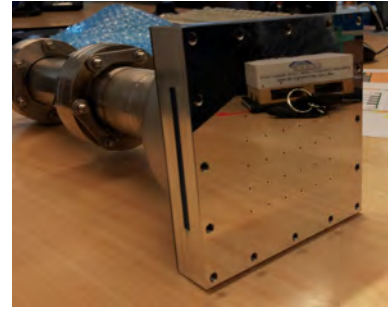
Assembled feed through during the vacuum test showing the polished patch panel surface.
